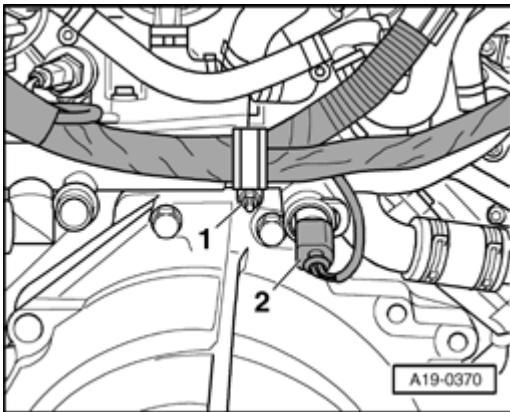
Disconnecting Electrical Connector On Engine Coolant Temperature (ECT) Sensor G62 & Removing Nut And Electrical Wiring Harness At Rear Coolant Pipe
